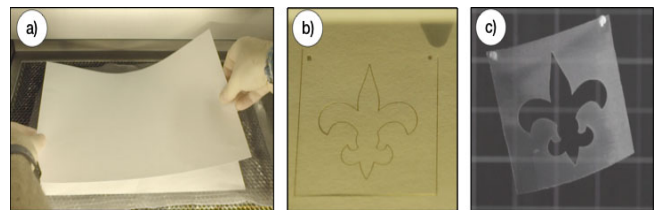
Fabricating *LeviProps*. a) Placing the SuperOrganza fabric between two sheets of papers. b) laser cutter cutting the outline of *LeviProp* and marks for the bead location. c) Final *LeviProp*, produced by gluing the beads to the designated points.
